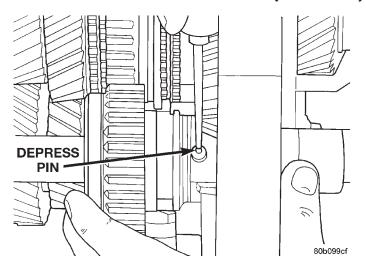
Depress Pin In Reverse Idler Gear Shaft
